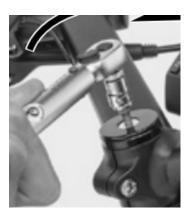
Headset tightening step one loosen stem screws F then tighten the top cap
